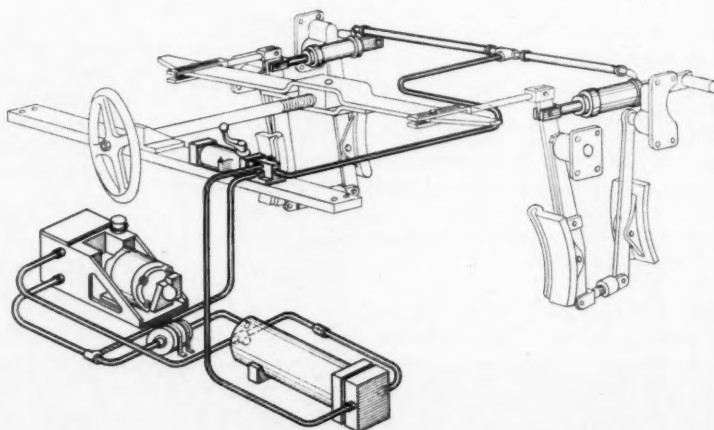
Hydraulic mounting with hand brake retained as independent unit
